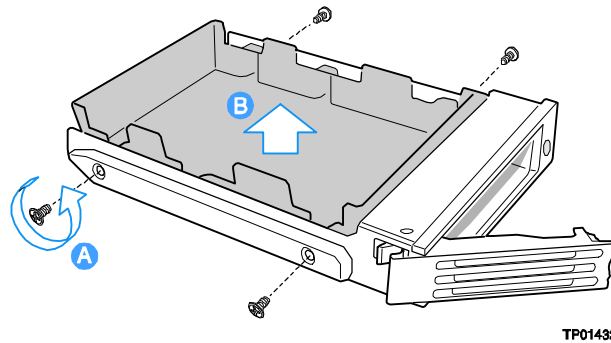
Removing the Air Baffle from the Hard Drive Carrier
